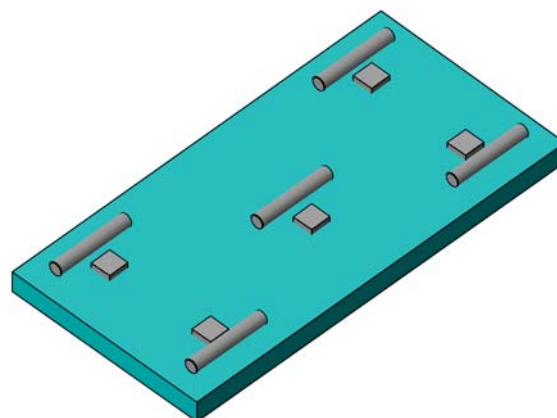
Example of Tension Test Blanks and Additional Test Specimens Placed in Five Locations on a Build Platform
